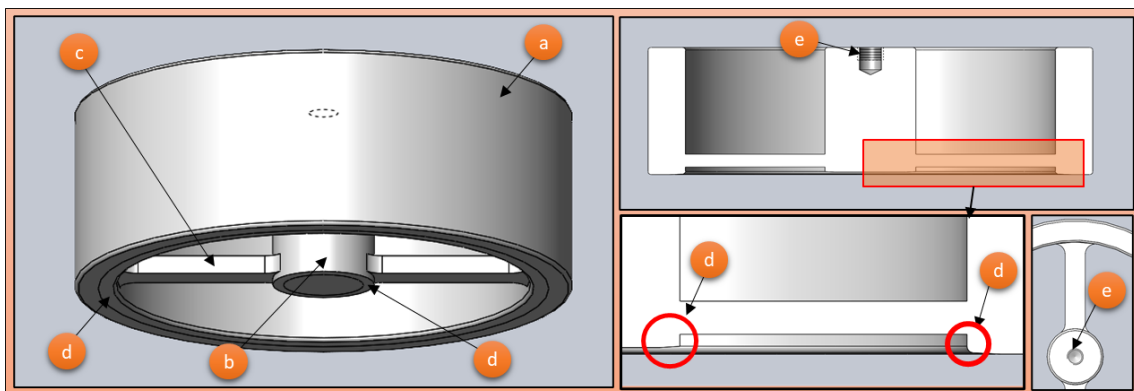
Pillar 24 final design, a: outer ring, b: center column, c: non-structural joist, d: edge curvature, e: lid connection (M8 tapped hole)
